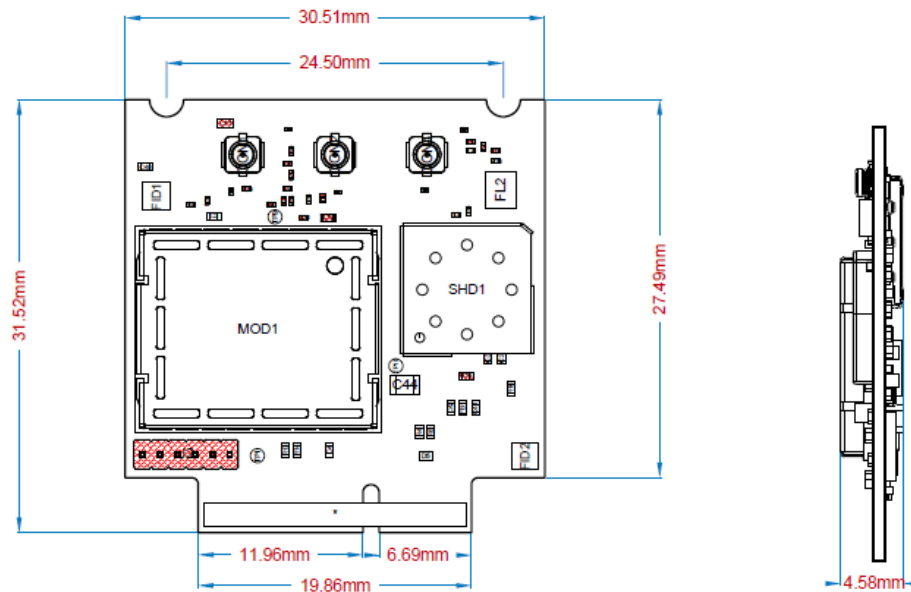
Pinnacle™ 100 453-00011 mechanical drawings
